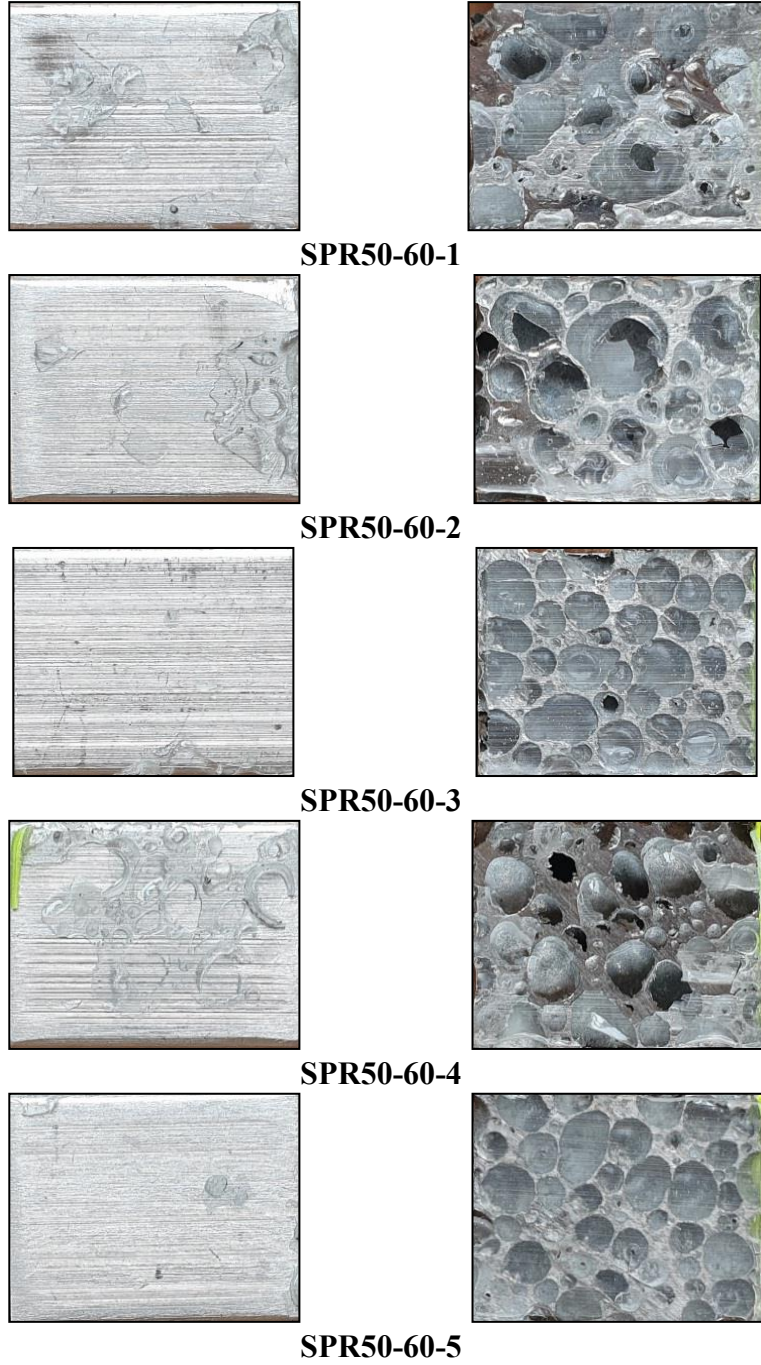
Bonding Surfaces of Aluminium Block and Specimens with Surface Porosity Ratio 50-60% (SPR50-60) after Shear Test.
